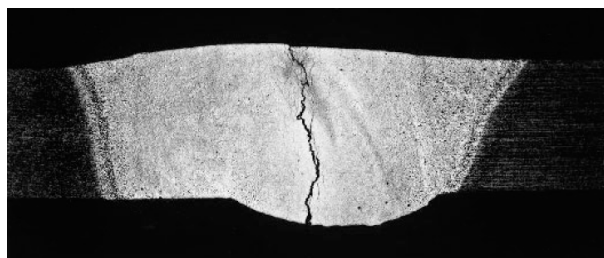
Hot cracking in a TIG plate butt weld.
